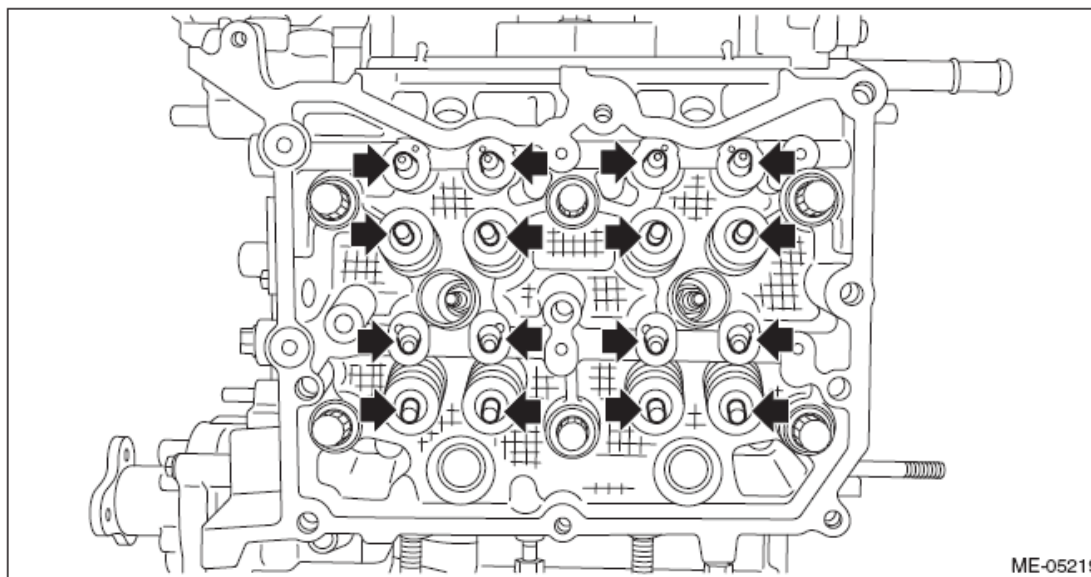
Locating Valve Shim And Roller Rocker Arm Pivot
